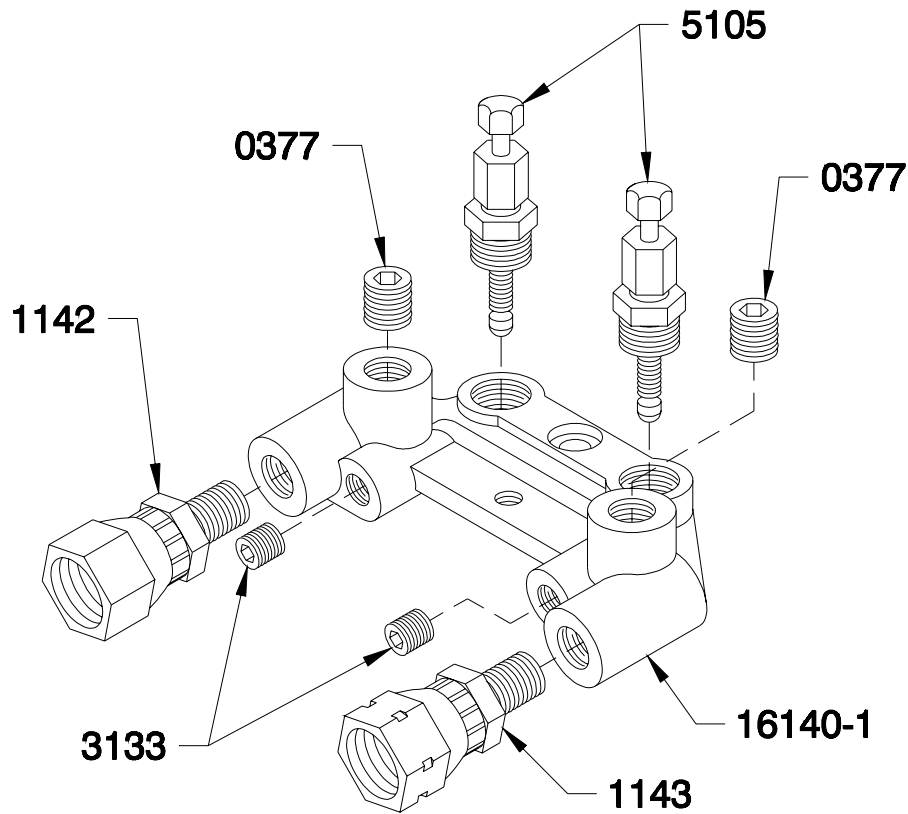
Coupling Block Assembly, (Part No. 16140), Exploded View
